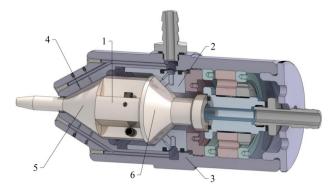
3D model of non-contact drive. 1 – rotor; 2 – footstep thrust journal bearing; 3 – housing; 4 – orifices of feeding holes; 5 – left thrust journal bearing; 6 – right thrust journal bearing.
